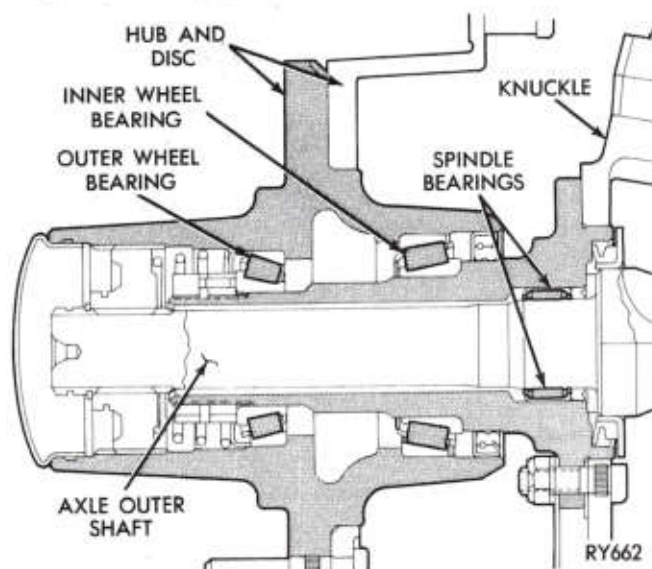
Front Wheel and Spindle Bearings 4-Wheel Drive Models
